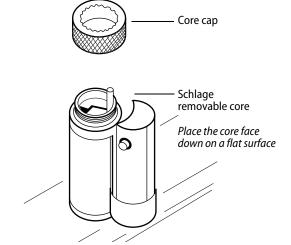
Unscrewing the cap from the Schlage core to be adapted
